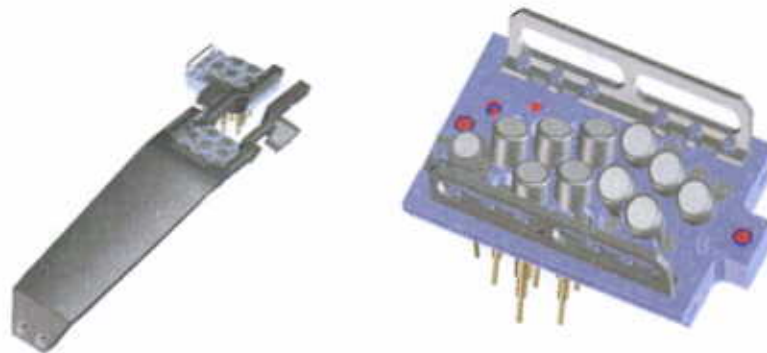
(a) The assembly of the sensors for wall thickness measurement, (b) assembly for crack detection.
